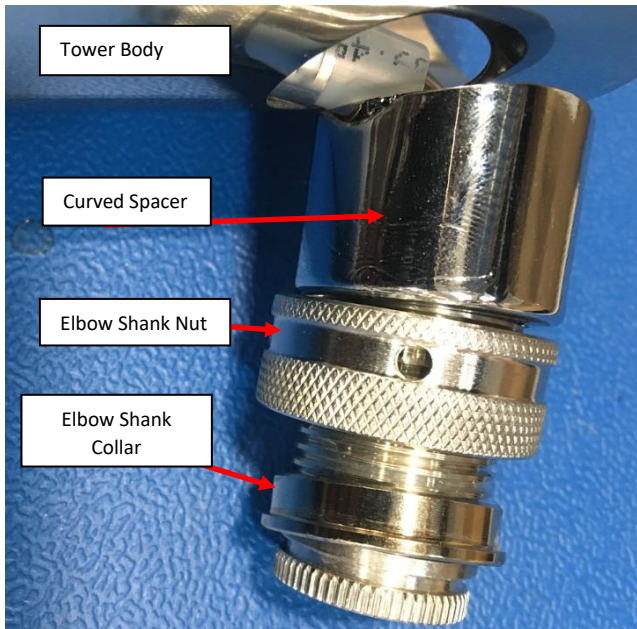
Elbow Shank components pulled back to expose Snap Ring.
